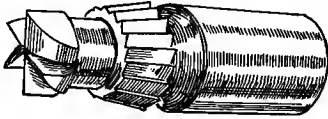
Drill employed in Drysdale Method of Testing Iron and Steel
